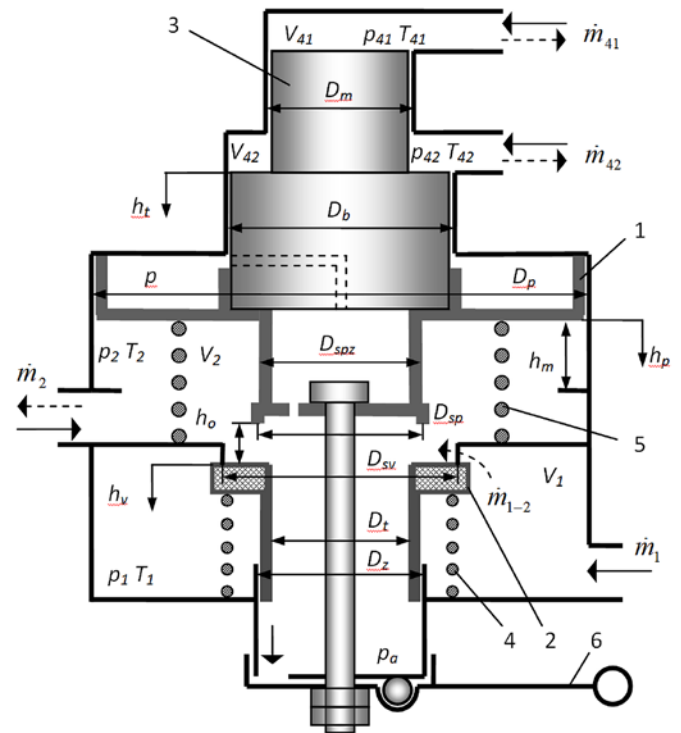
A hydraulically actuated trailer brake control valve: 1 – pneumatic control piston, 2 – inlet head, 3 – hydraulic graduating piston, 4 – head spring, 5 – piston return spring, 6 – hand brake mechanism [13]
